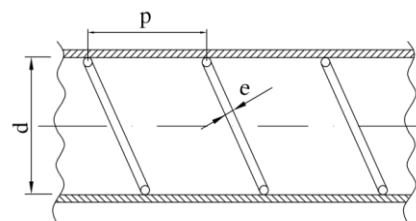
Sketch of helical wire coil fitted inside a smooth tube
